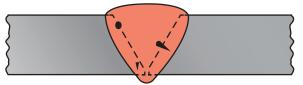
Welding defects with radiographic images. (*Continued*)
